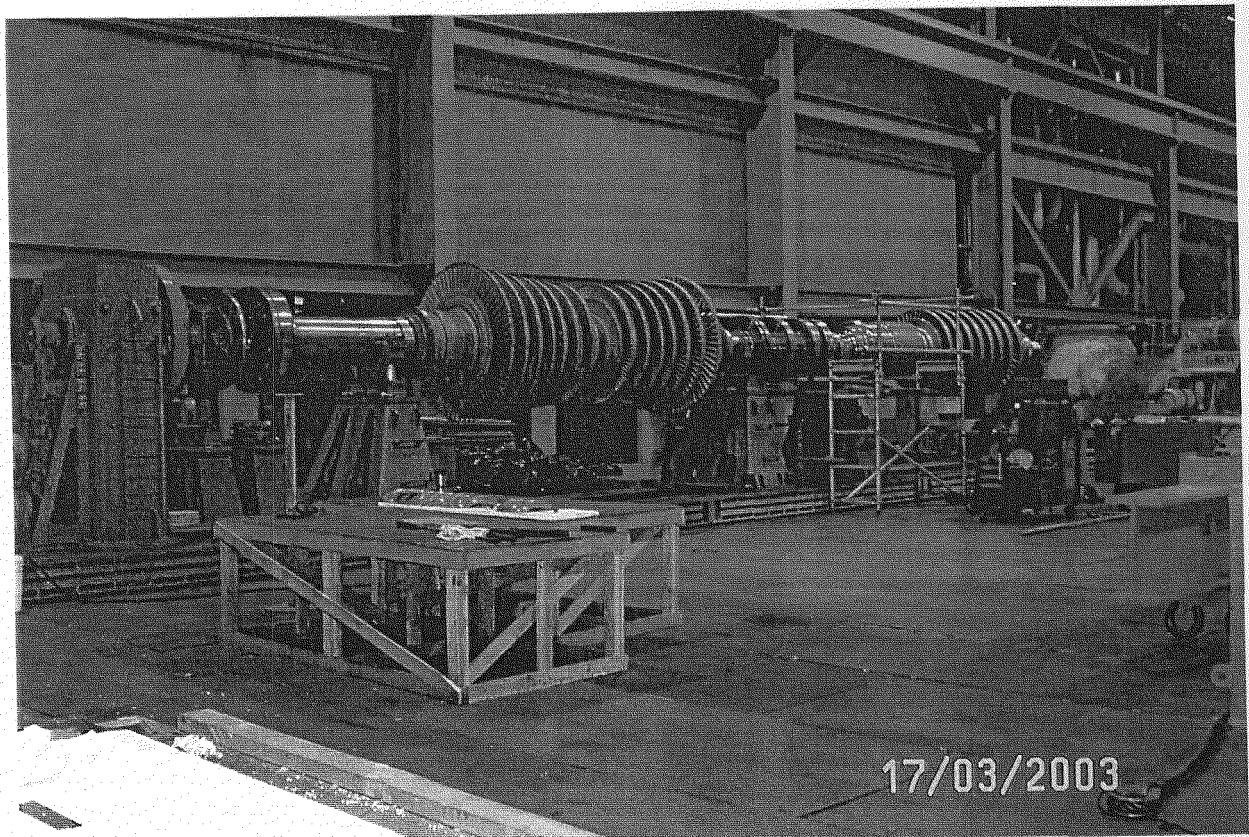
HP FRONT BEARING T1 (RE-USED)
